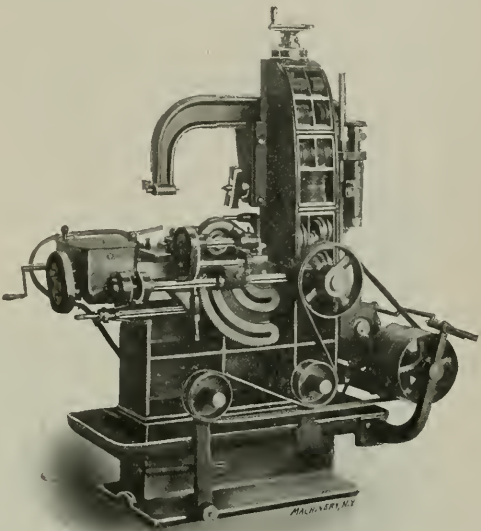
Rear of Machine, showing Provisions for Cutting Bevel Gears.
